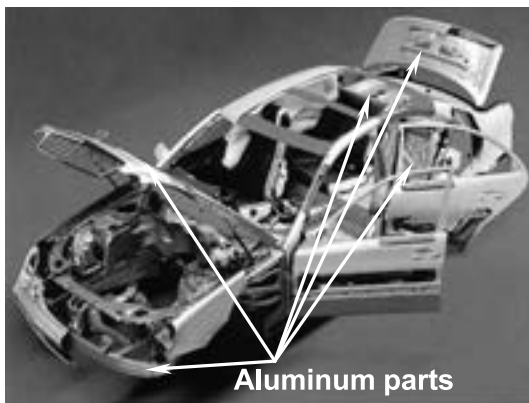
Aluminum body parts on Mercedes Benz E class (W211)¹¹⁾.
